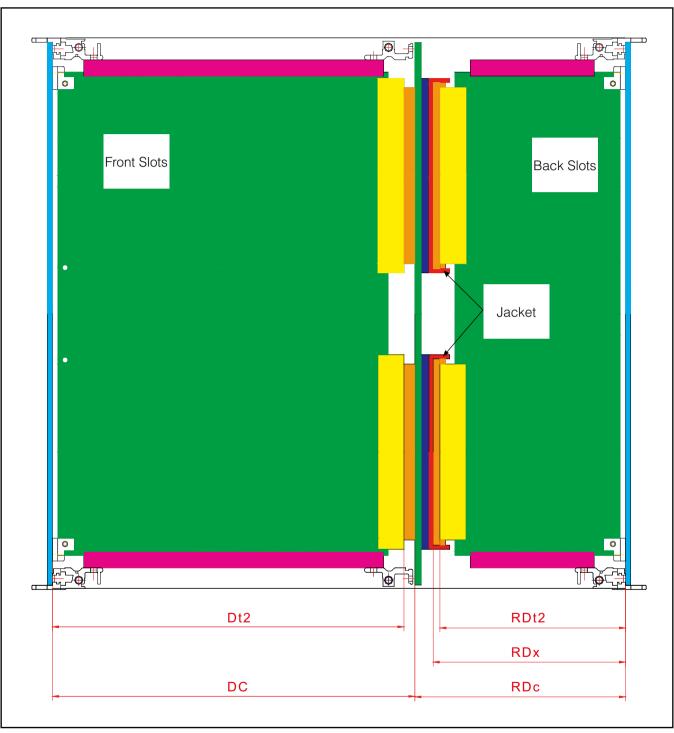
Illustrative for inspecting the depth and dimension of plug-in slots
